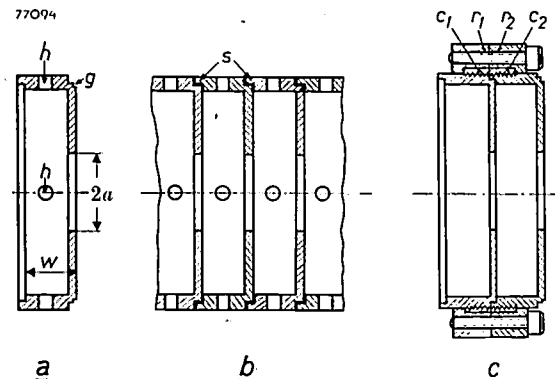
a) One of the 316 cells from which the corrugated guide is composed. Two types of cells are used, viz. of pitch $w = 2$ cm and 1 cm respectively. g = groove for solder ring. h = pumping holes. a = inner iris radius.
